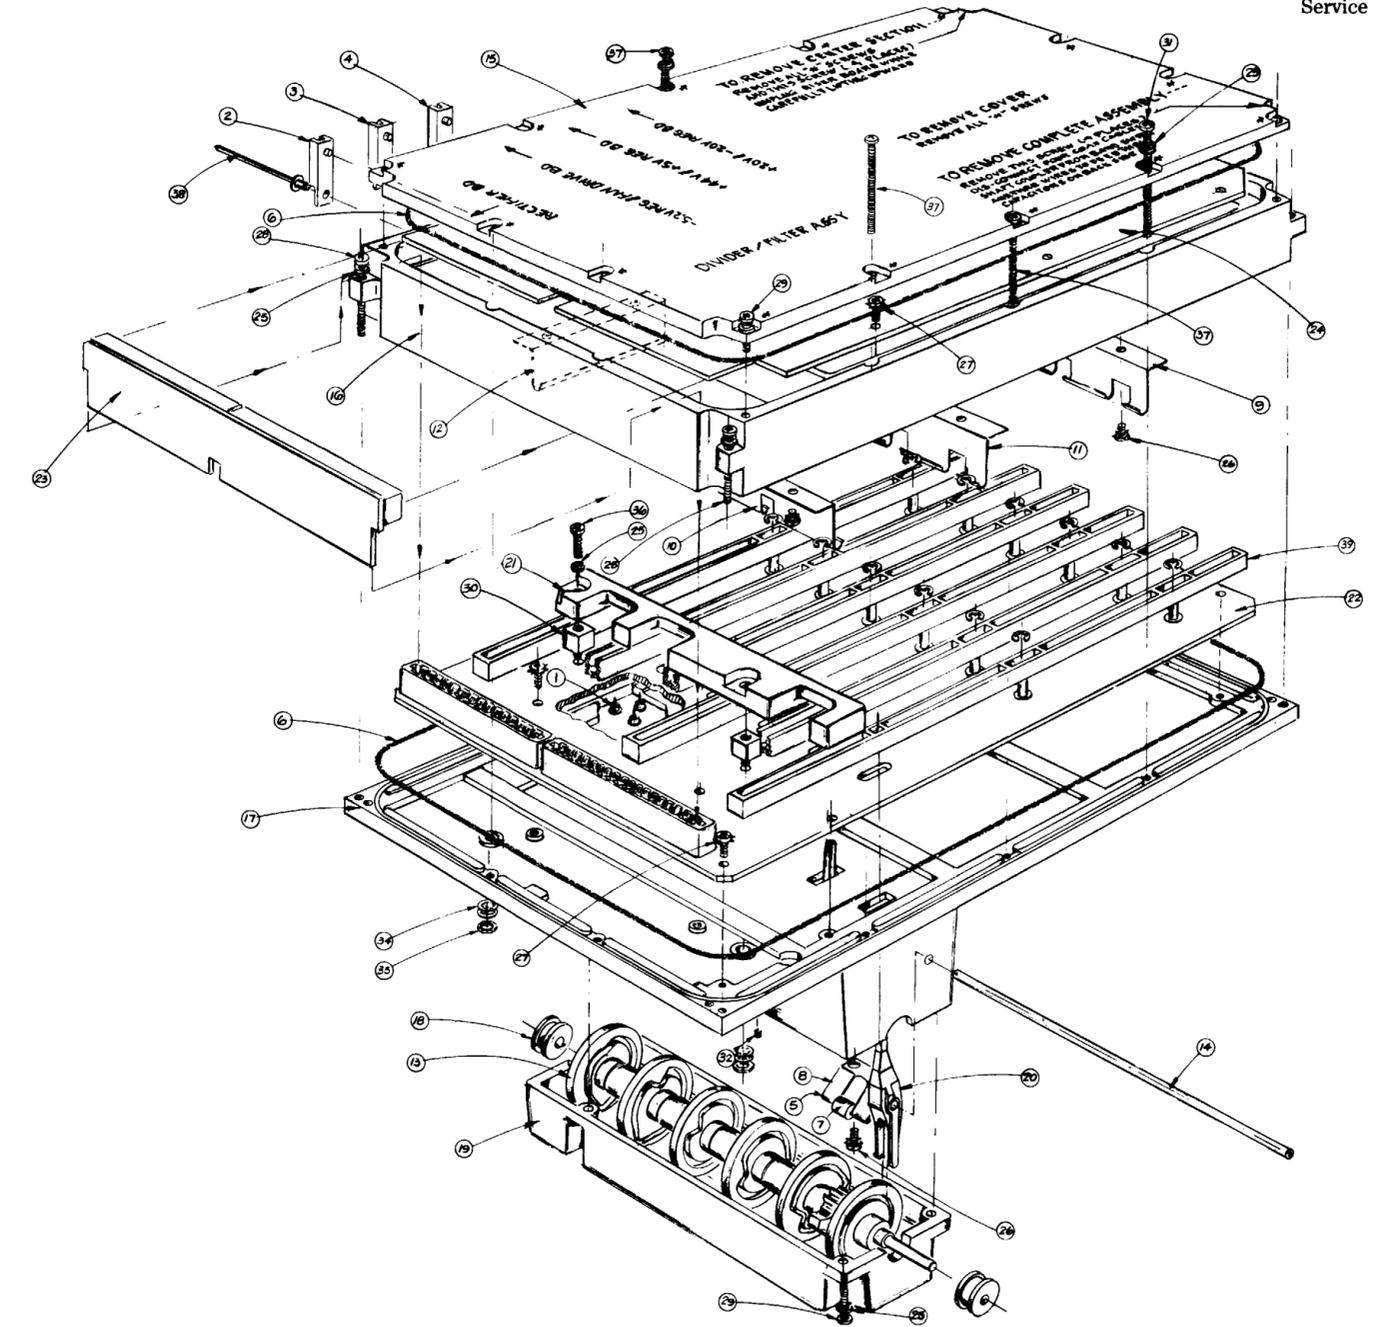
A10 Divider/Filter Assembly Illustrated Parts Breakdown
